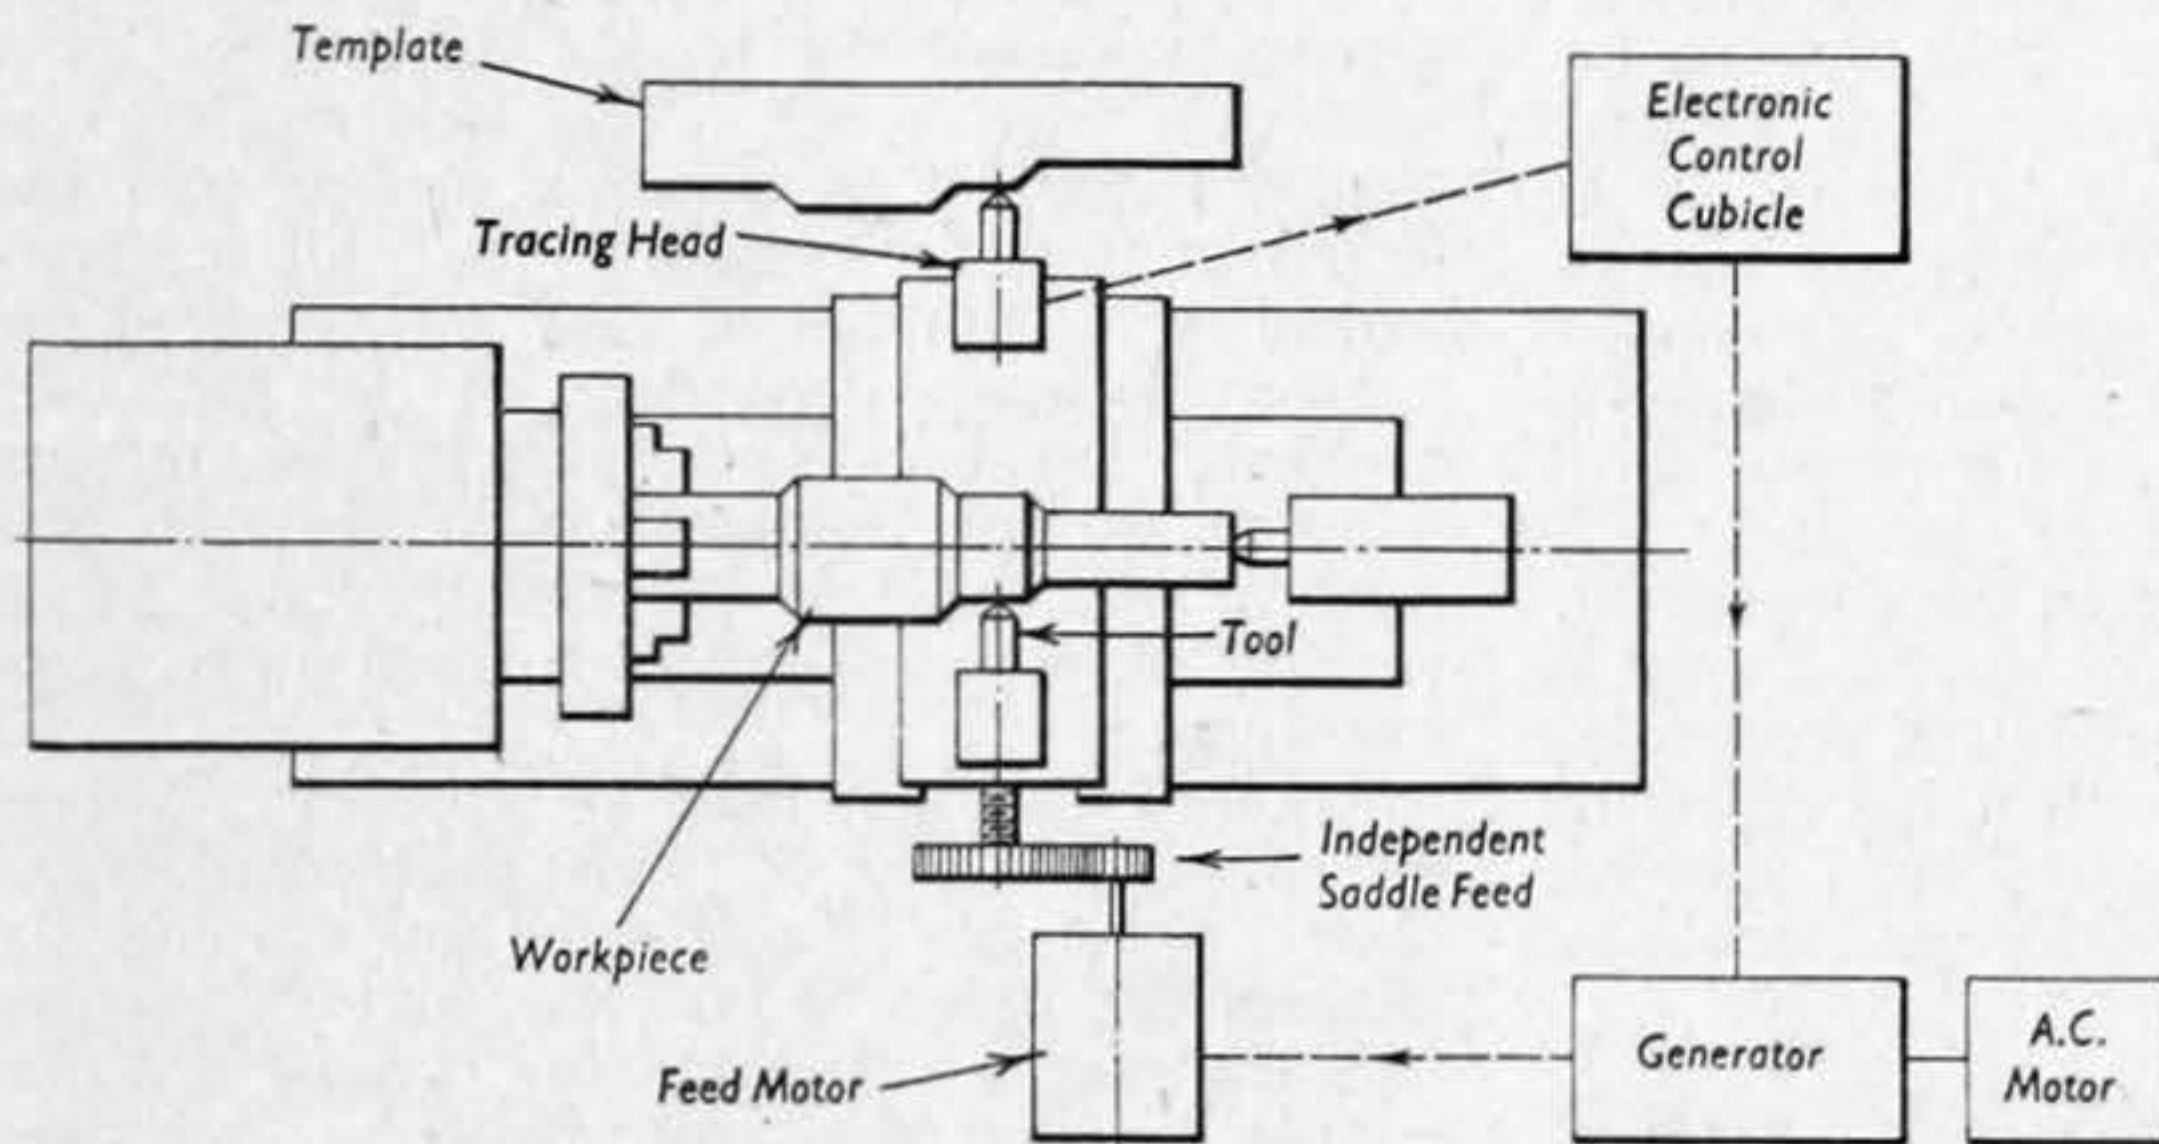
Cross-slide of lathe moved by feed motor under electronic control (single dimension tracing)
